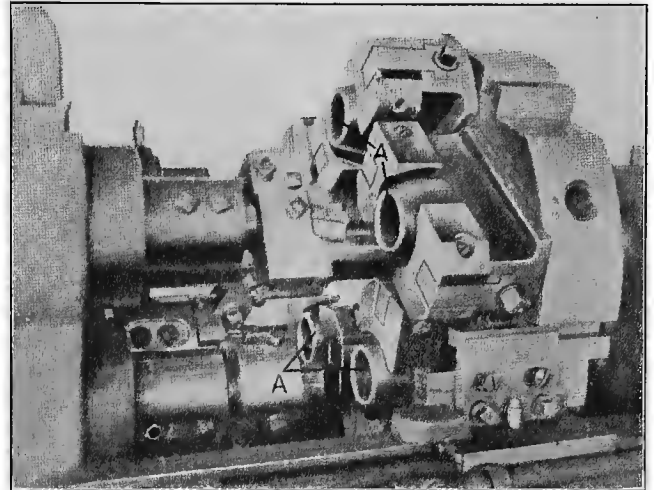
VIEW OF CHUCK JAWS FOR SHRAPNEL HEADS
